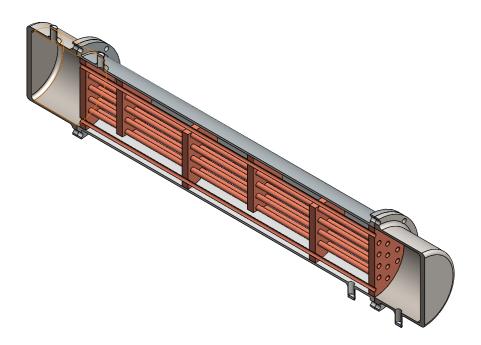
A Cutout View of the Heat Exchanger Assembly.
